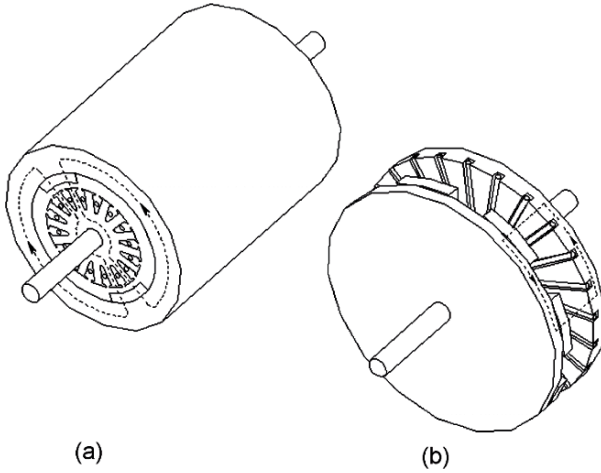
Topologies of (a) RFPM machine (b) AFPM machine.
